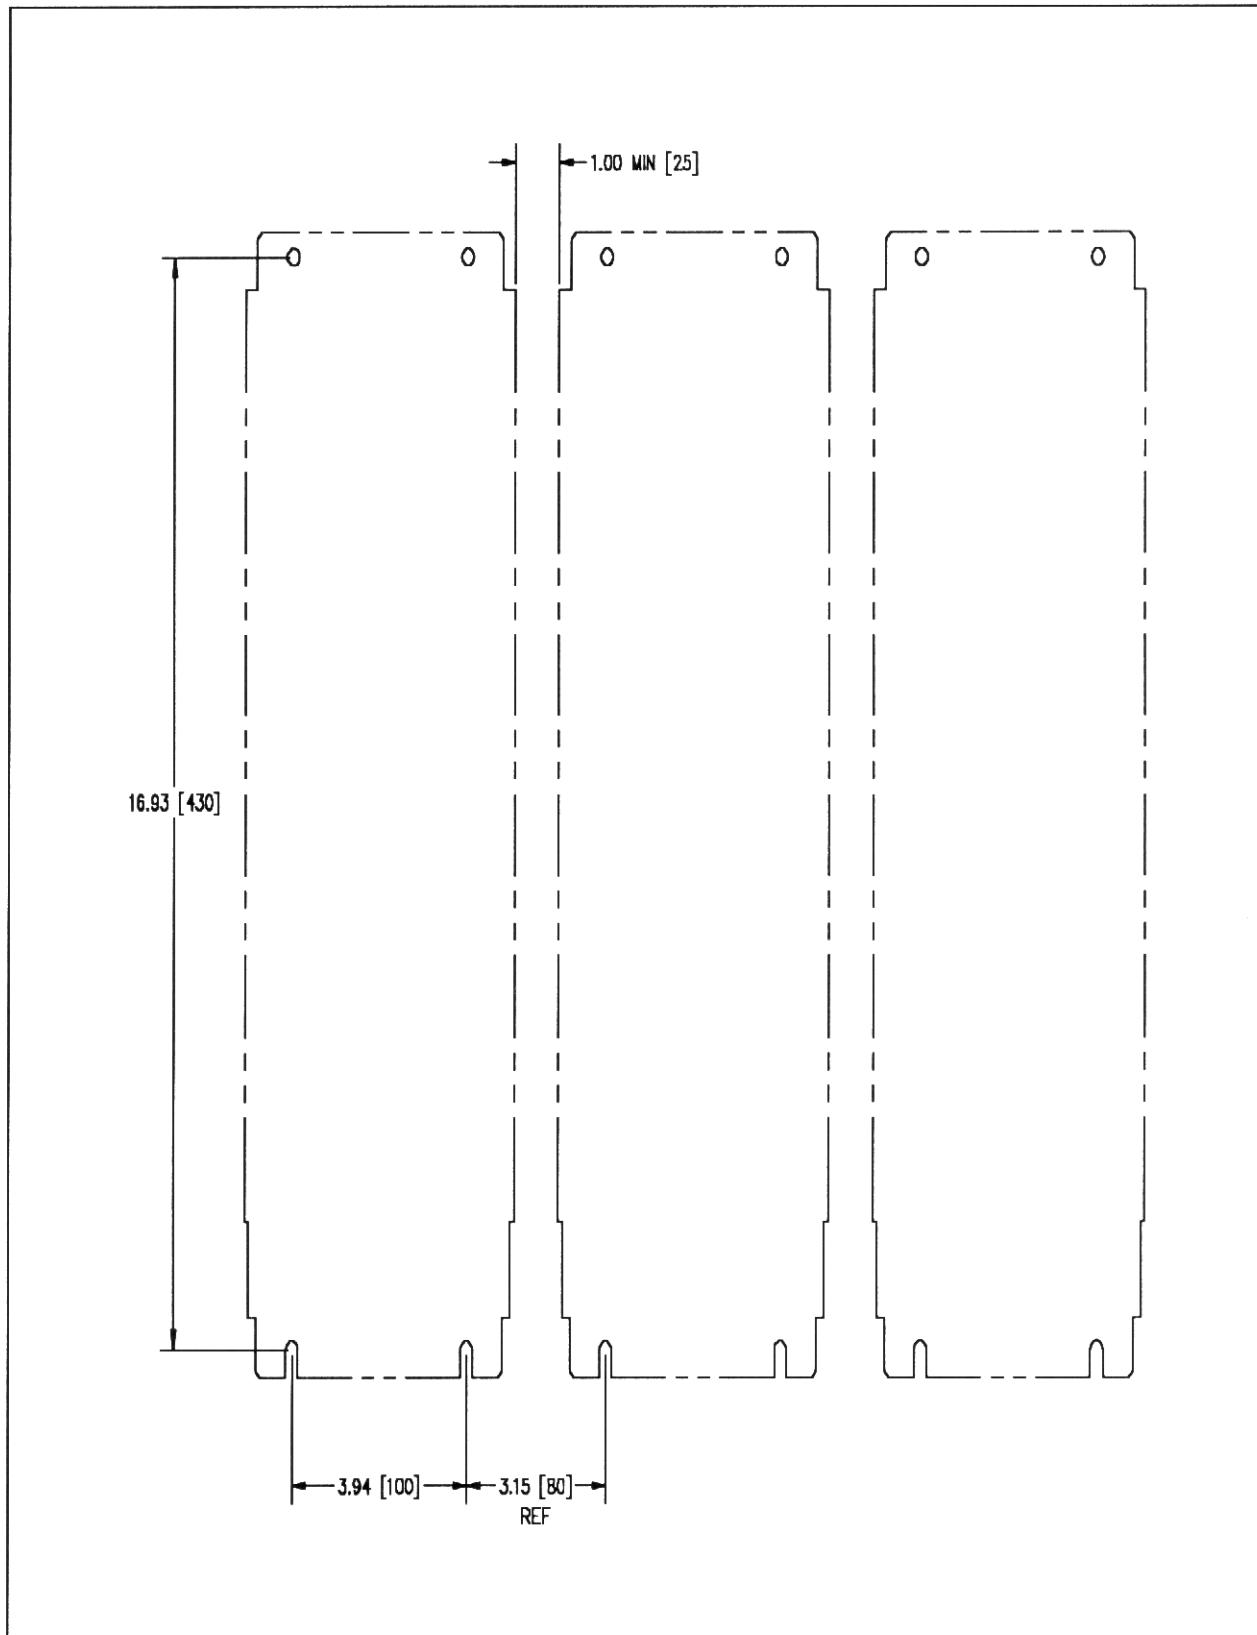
BSD7-R0400 Thru BSD7-R3700 Drivers Mounting Plate
